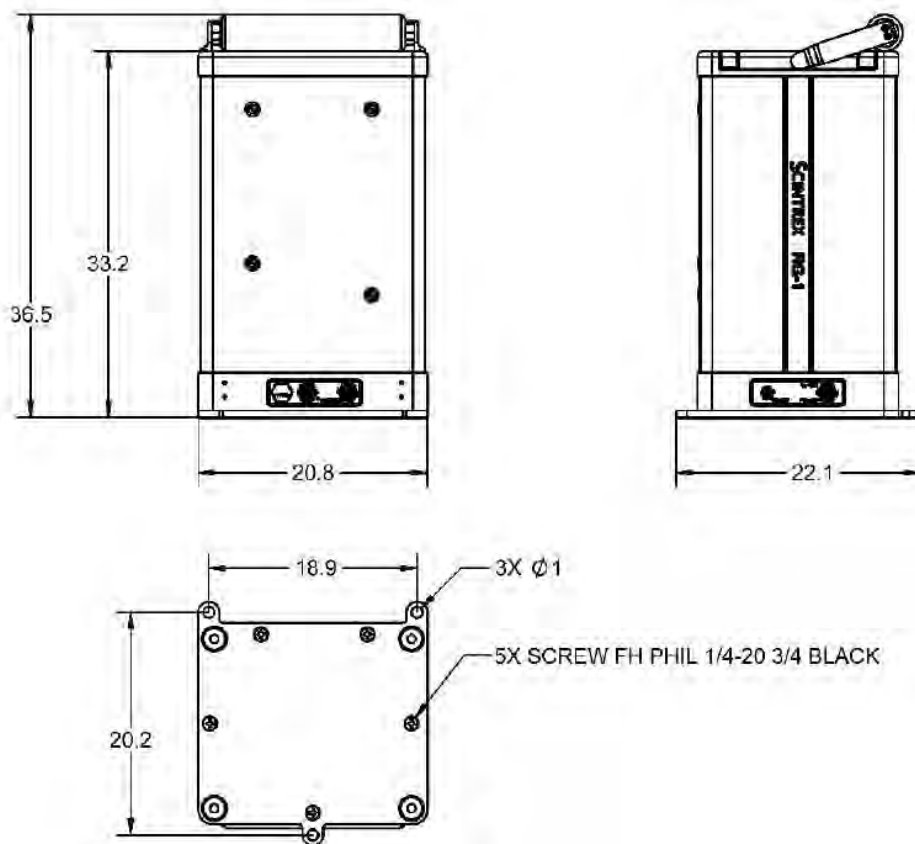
RG-1 Unit with Mounting Plate Installed (unit: cm)
